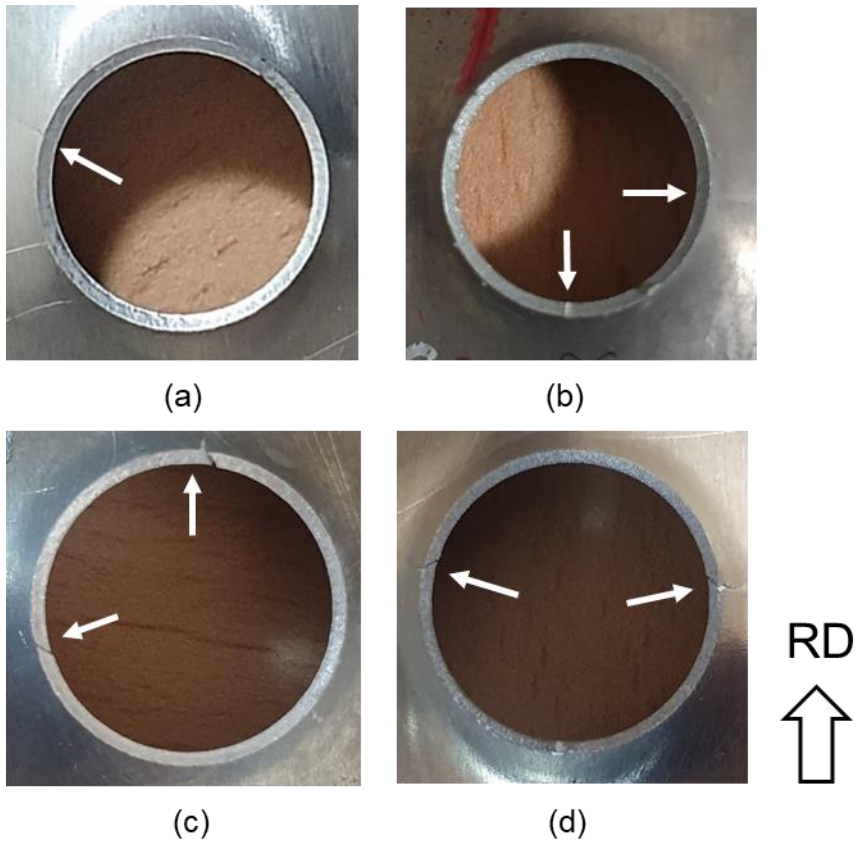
The appearance of cracks at the hole edge in fractured specimens for both tempers and methods: (a) punched specimen of T6, (b) wire cut specimen of T6, (c) punched specimen of -W, (d) wire cut specimen of -W
